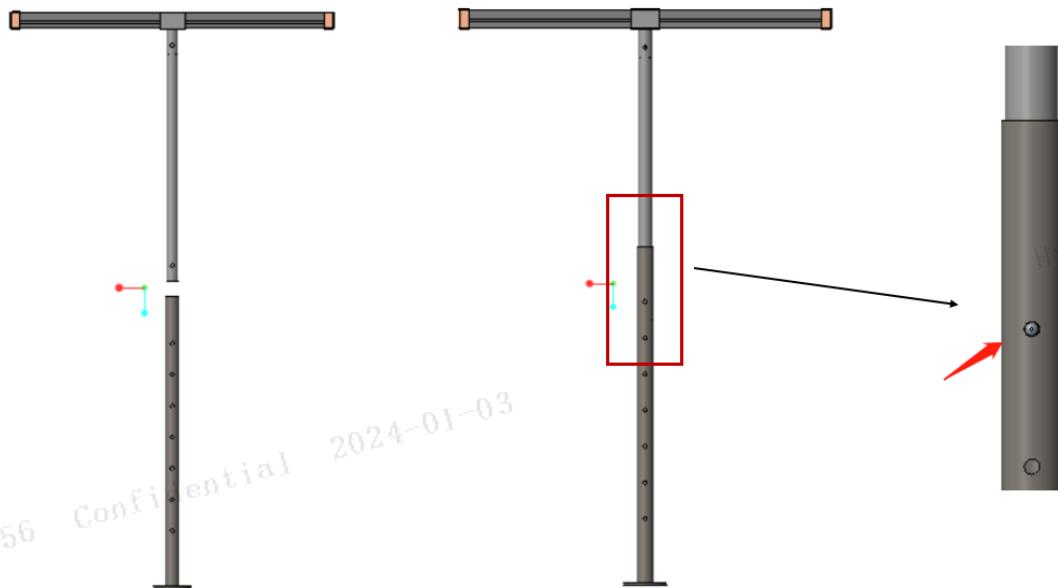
T-shaped upper bracket and guide rail installation diagram
